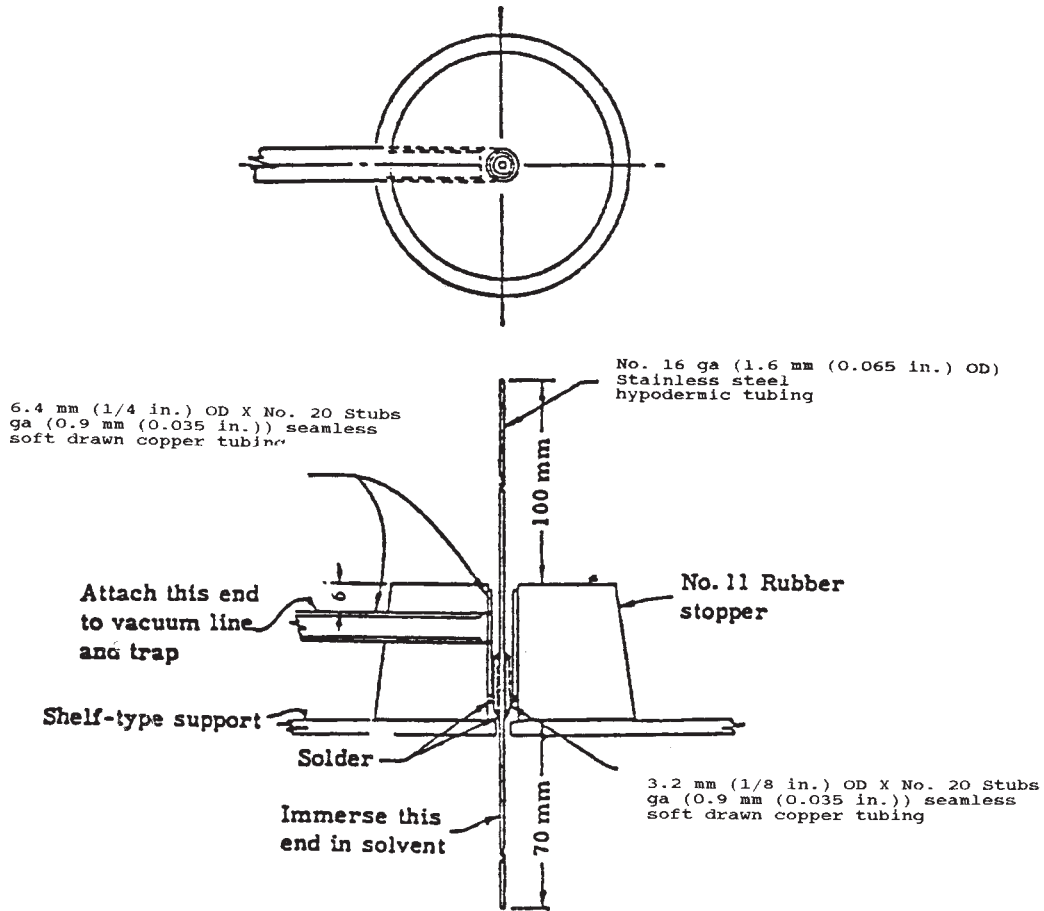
Cleaner Assembly for Bingham-Type Pycnometer
